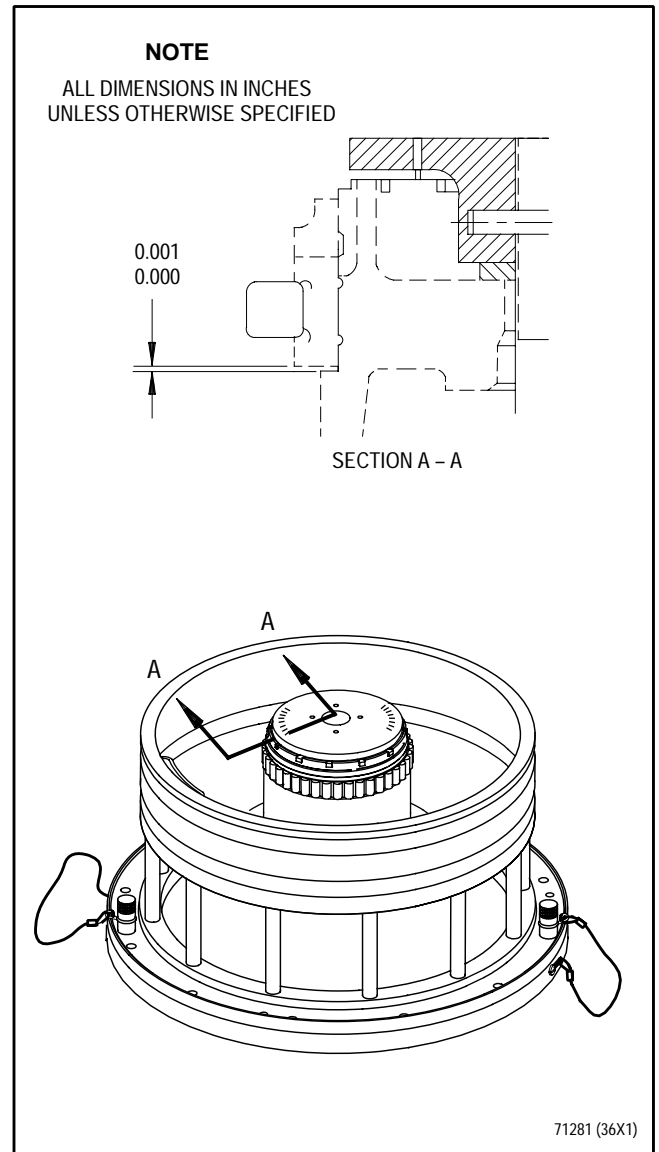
No. 5 Bearing Inner Support Assembly and No. 5 Bearing Inner Race and Rollers - Assembly (Sheet 5 of 6)
